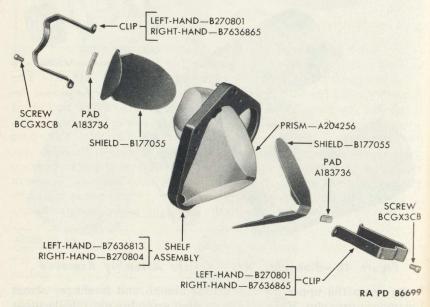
Binocular M17—Prism Shelf Assembly Disassembled
